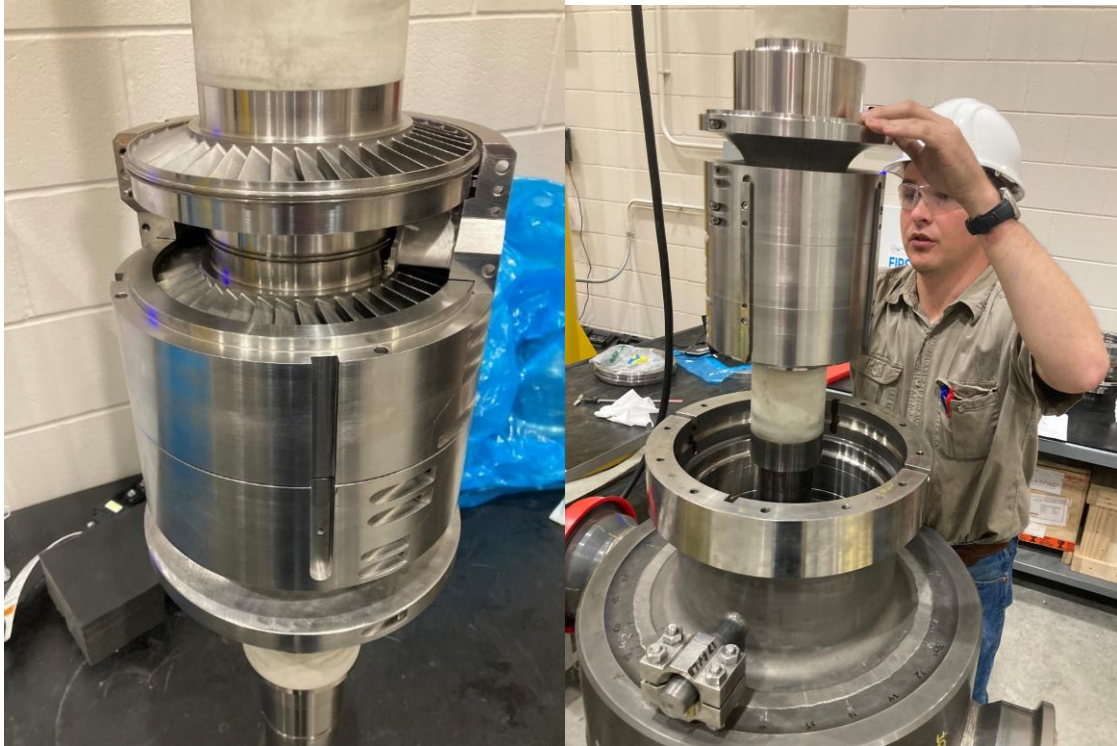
Installation of Rotor/Stator Assembly into the Case
